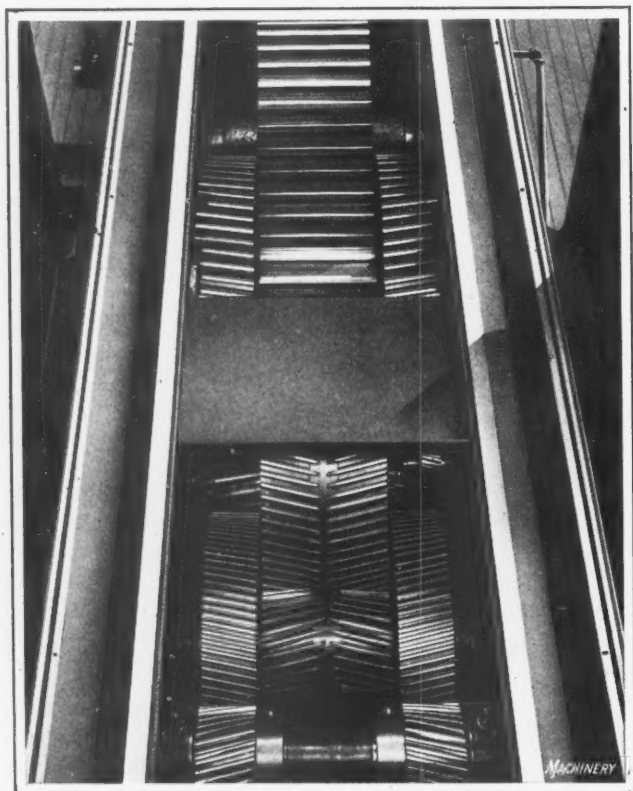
View of the Balanced Helical Gear Drive to the Table
